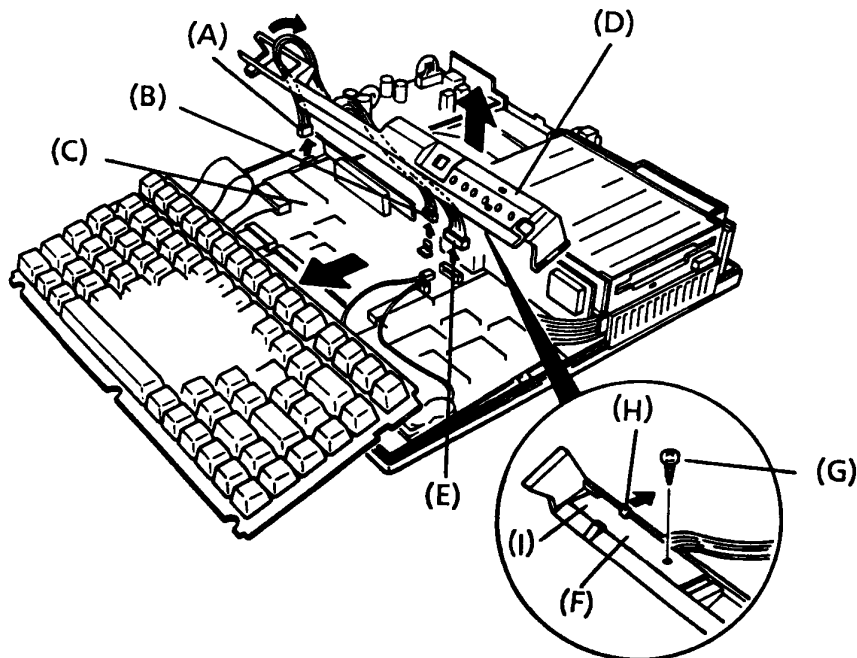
Removing the Keyboard Bridge and Indicator PCB
